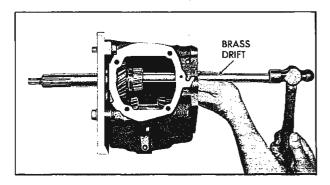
Installation of Main Drive (Clutch) Gear Assembly
